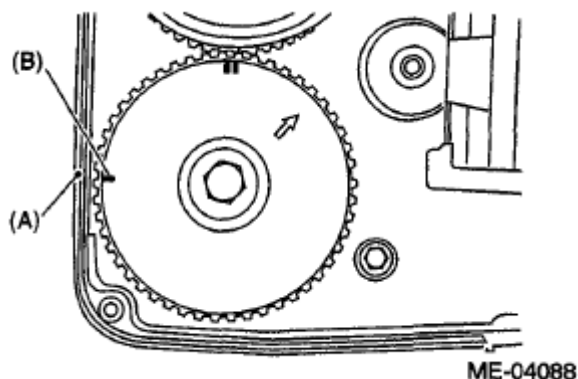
Identifying Aligning Mark On Exhaust Cam Sprocket RH Single Line Mark With Timing Belt Cover Notch
